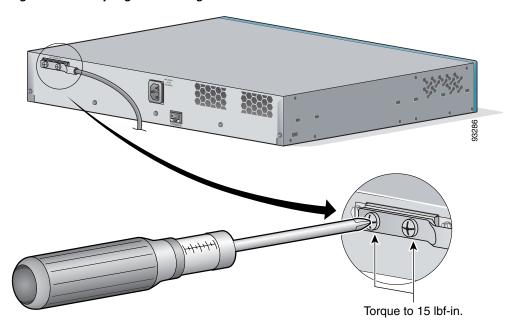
Torquing Ground-Lug Screws on the Switch
